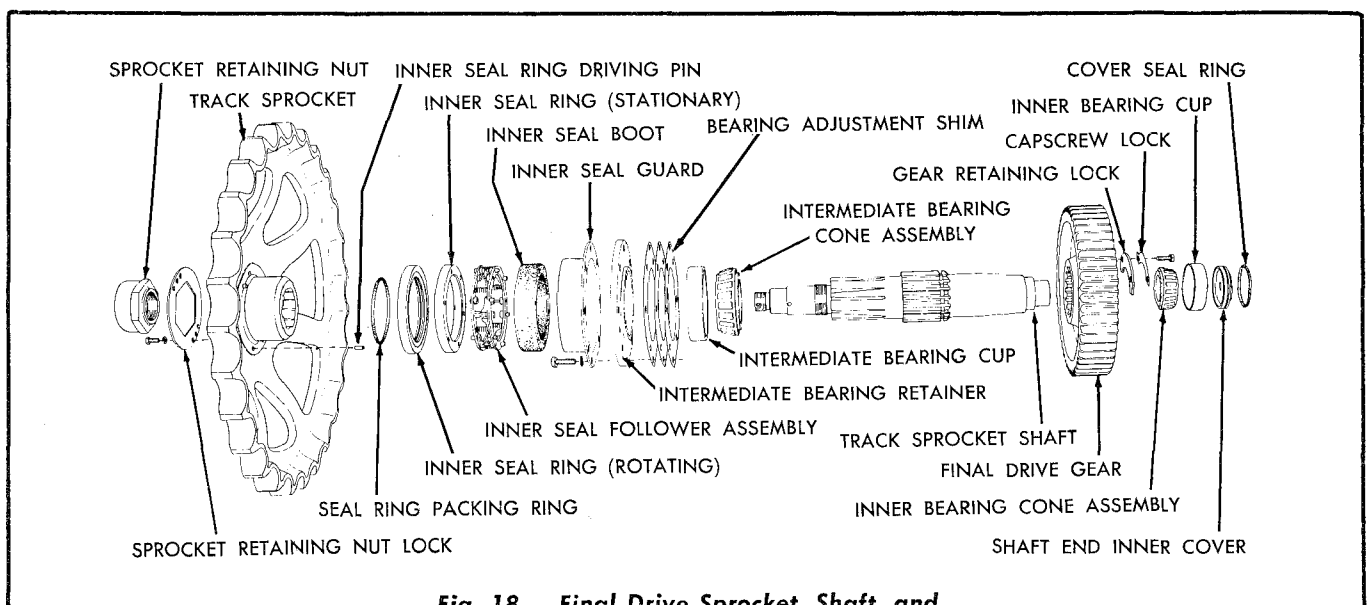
Final Drive Sprocket, Shaft, and Gear Details
